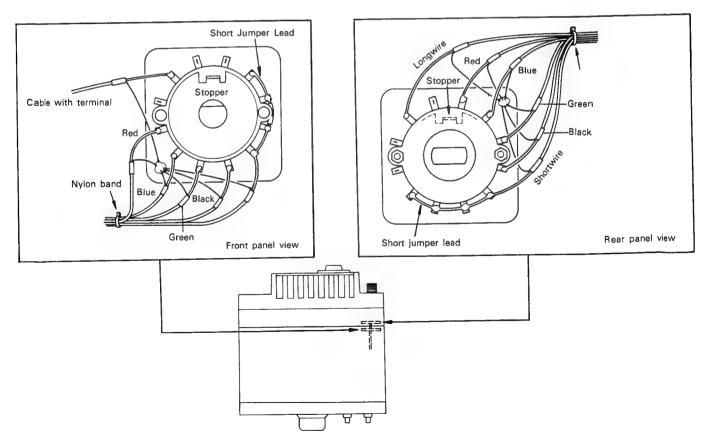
BAND rotary switch (S01-2417-05) wiring.
